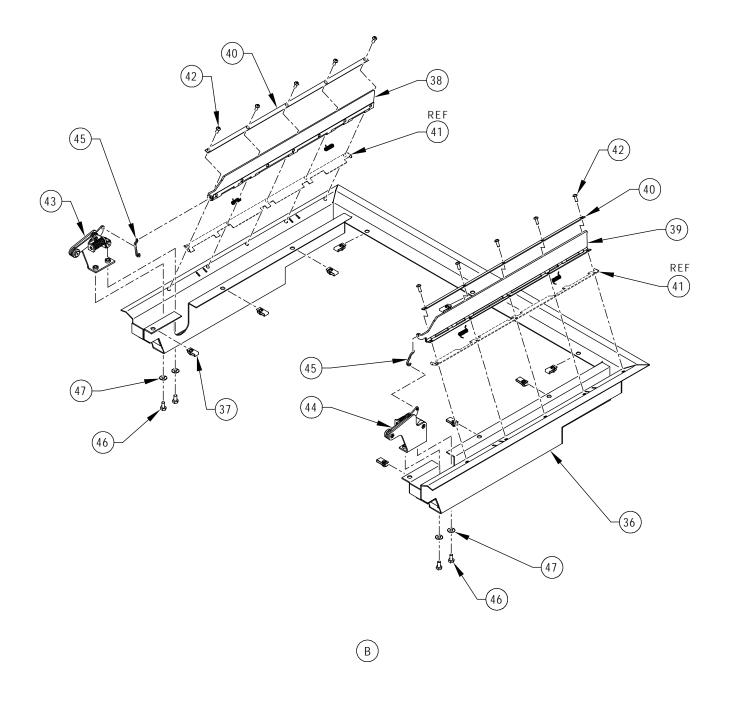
BR2C-SERIES RAMP ASSEMBLY
